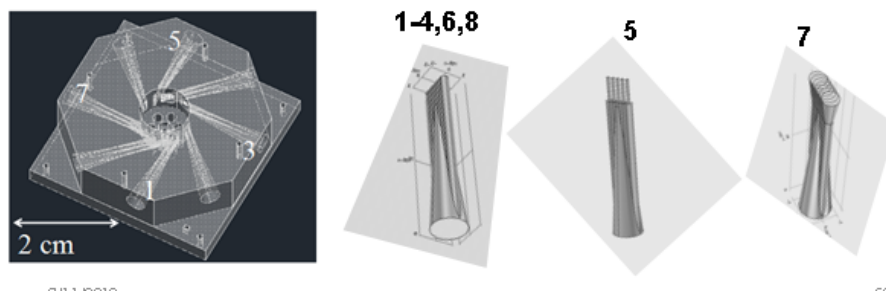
left: exploded view of the turbine enclosure with the nozzles, right: 3 types of nozzles
